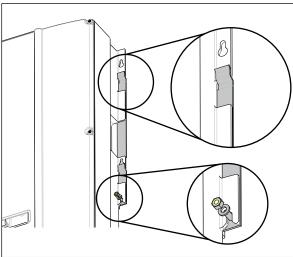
Attaching the solar power inverter to the mounting plate
